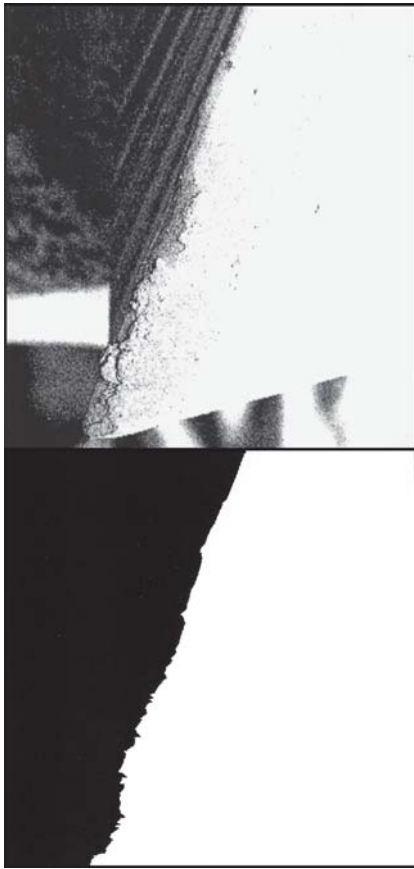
Worn 9.525 mm small milling cutter after 10 machining passes
